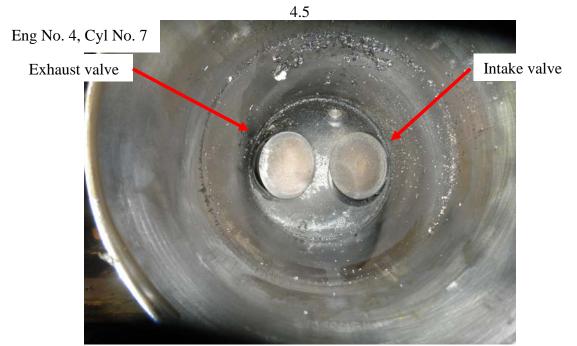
View of the inside of the No. 7 cylinder showing no damage to the barrel, although there were metal particles on the barrel wall and the two valves were open with the intake valve off center and the exhaust was off-center.
